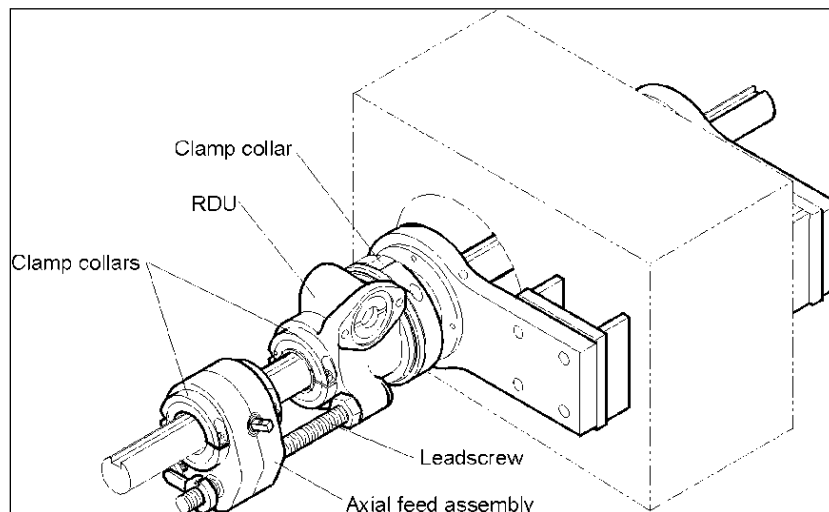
DISENGAGING THE AXIAL FEED
